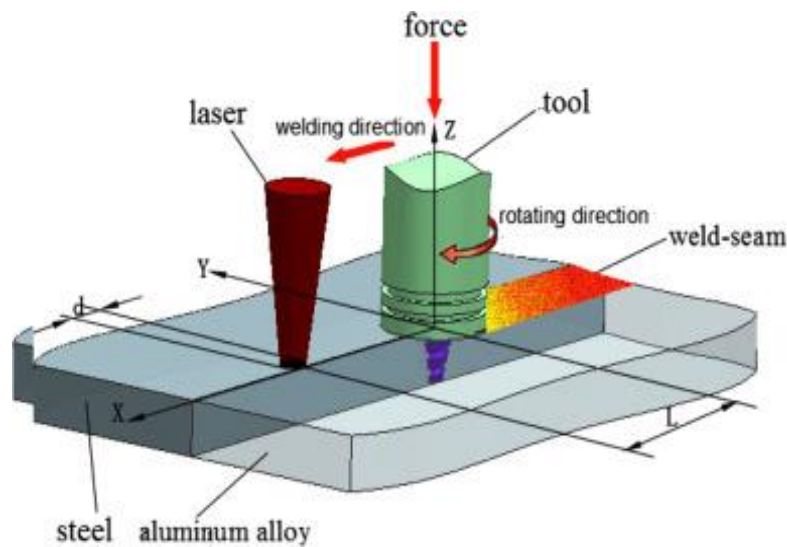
Schematic of the laser assisted friction stir-spot welding [71]
